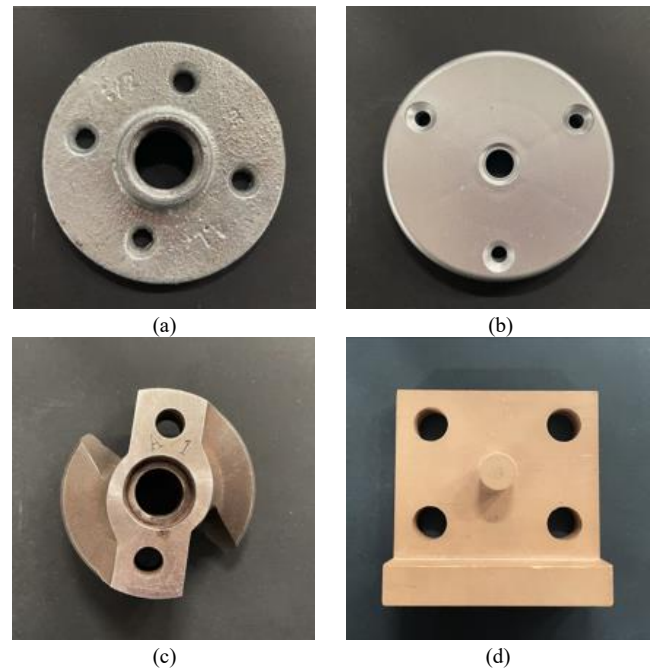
Assembly set: circular flanges with: (a) 4 holes, (b) 3 holes, (c) 2 holes, (d) square flange
